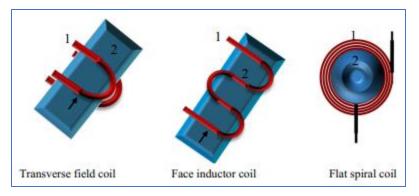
Induction heating coil configuration applications Coil : 1, coil; 2, workpiece/heatpiece [26-28]
